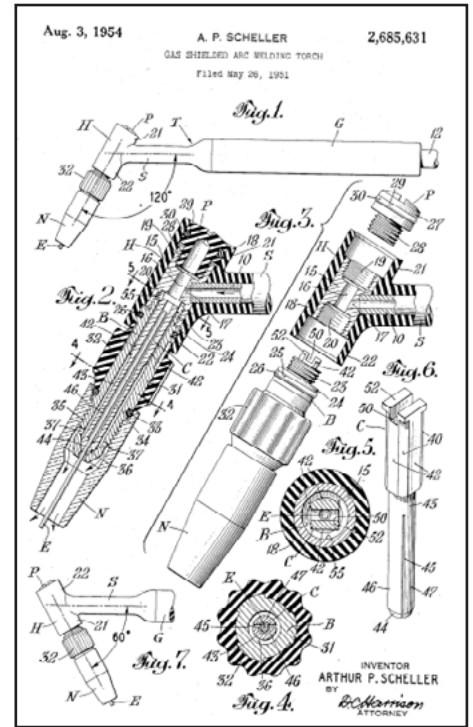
Patent by A. Scheller; no. 2685631 “Gas shielded arc welding torch” 03.08.1954 [25]
